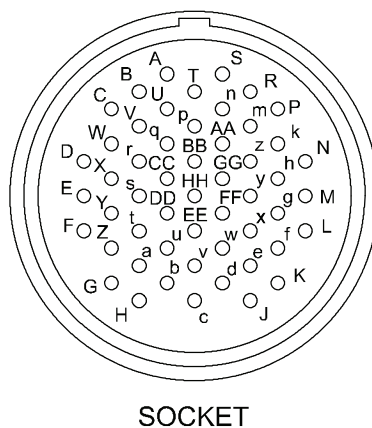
Umbilical Cable Assembly W4 Connections to HDC Control Box
